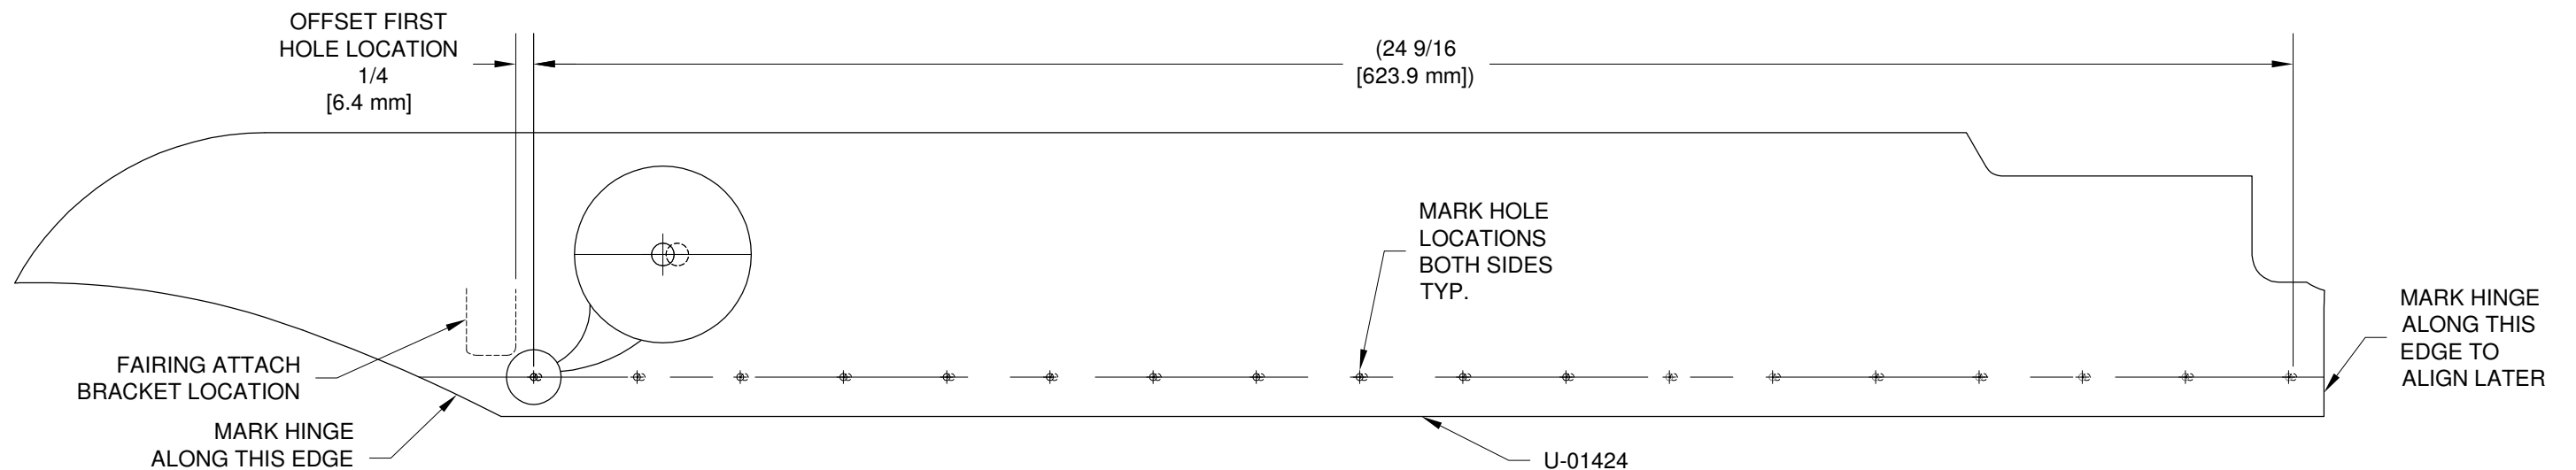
NOSE GEAR LEG FAIRING HINGE HOLE LOCATIONS
